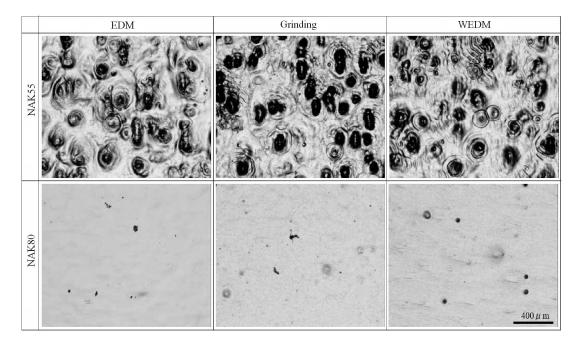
Microscope figures of machined surfaces of NAK55 and NAK80
